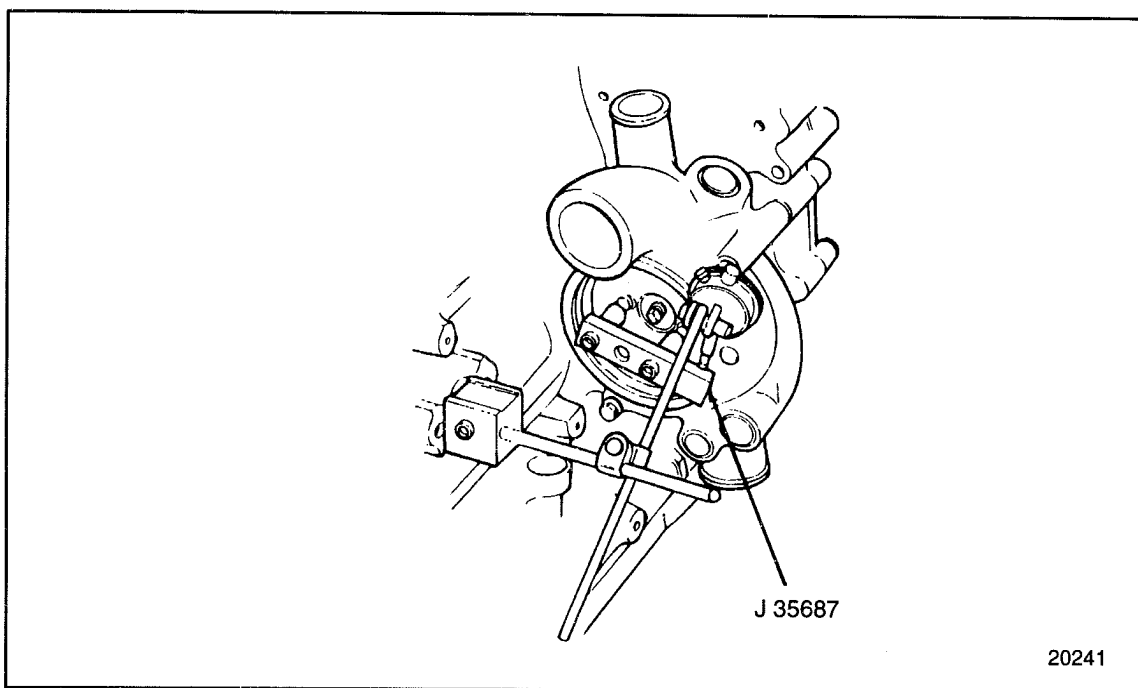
Water Pump Impeller Slip Tester Method
